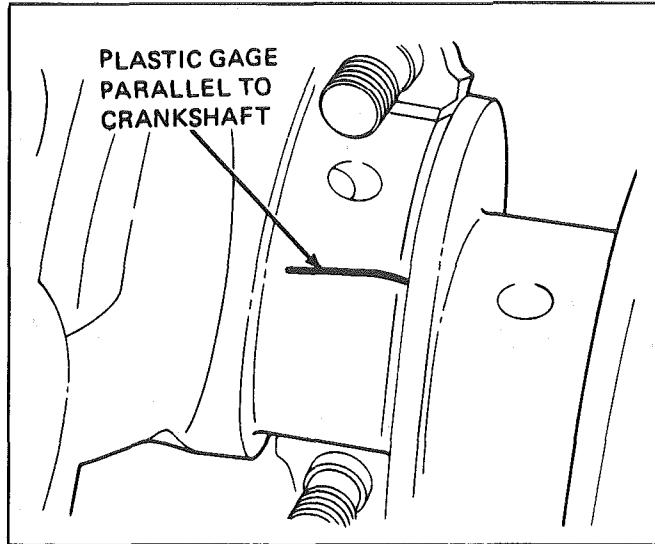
A3-35 Gaging Plastic On Crankpin-Typical
